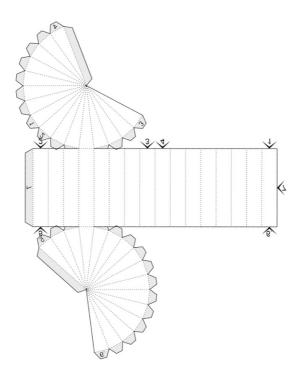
16 SIDED END CONES AND CYLINDERS CUT-AWAY IMAGE OF ITS SECTION
